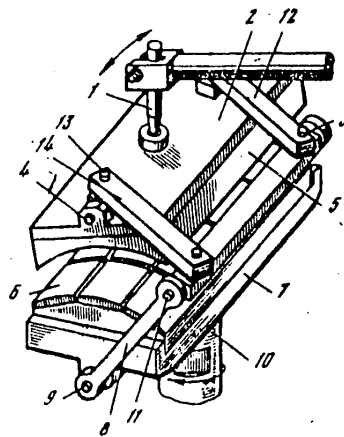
Diagram of the device for machining cylindrical and gently sloping toric surfaces.
